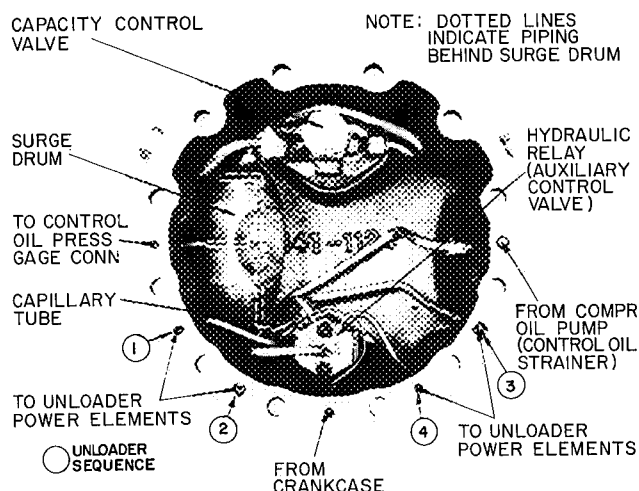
5H Pump End Cover and Control Assembly (5H40, 46, 60, 66, 80, 86)
